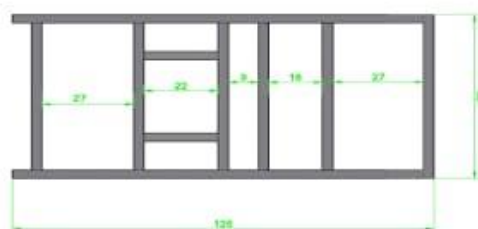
Systematic view of frame (All dimensions in mm)
